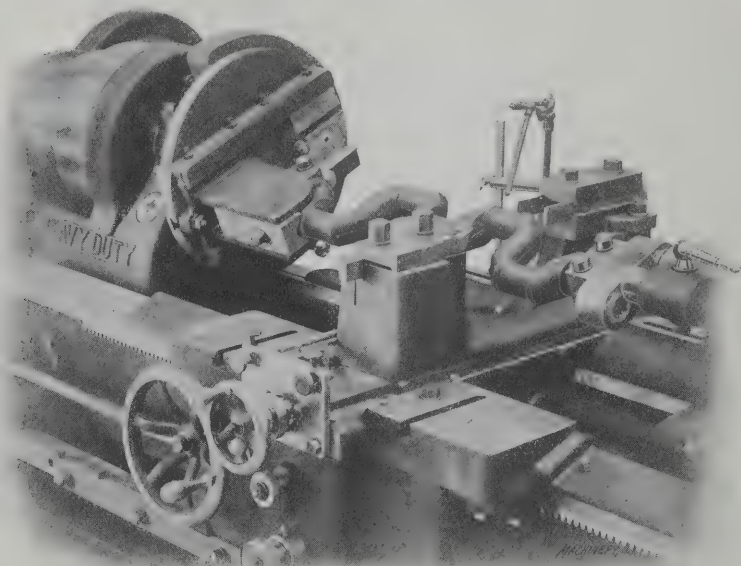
Detail View, showing Special Holding Device and Tool Stops
